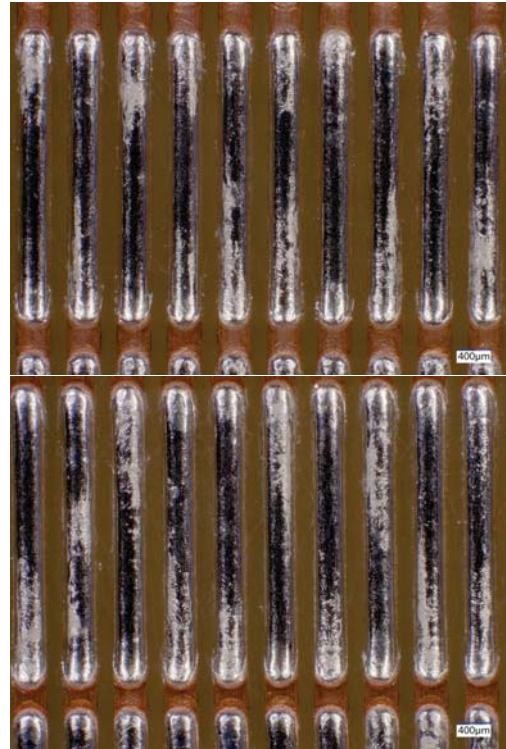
Wetting tests: Solder paste 228-11C (Top) and solder paste with 25% recycled solder powder 228-6A (Bottom)
